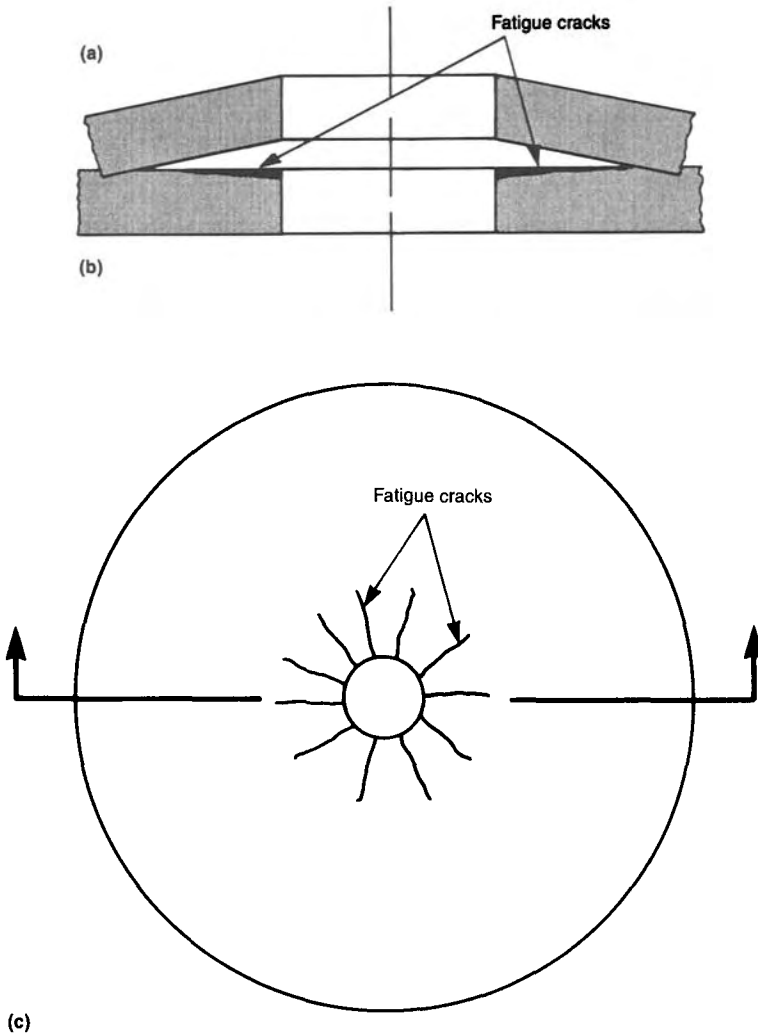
Sketch of a Belleville spring washer showing how fatigue cracks can form in a nominally compressive stress area. The spring, actually a cone-shaped spring steel washer, is shown in the (a) free condition and (b) in the flattened condition. When flat, the corner of the hole on the convex (upper) side becomes compressively yielded, causing tensile residual stresses when the load is released. Repetitive loading to the flat condition causes radial fatigue cracks to form on the convex side (b) and (c), but the cracks do not cause fracture. Eventually, independent fatigue cracks may form on the lower (concave) surface that will lead to complete fracture.
